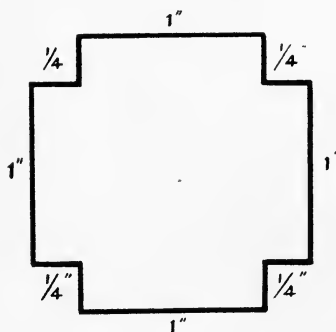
Cross-shaped Cutter. [.] in Fig. 63.
